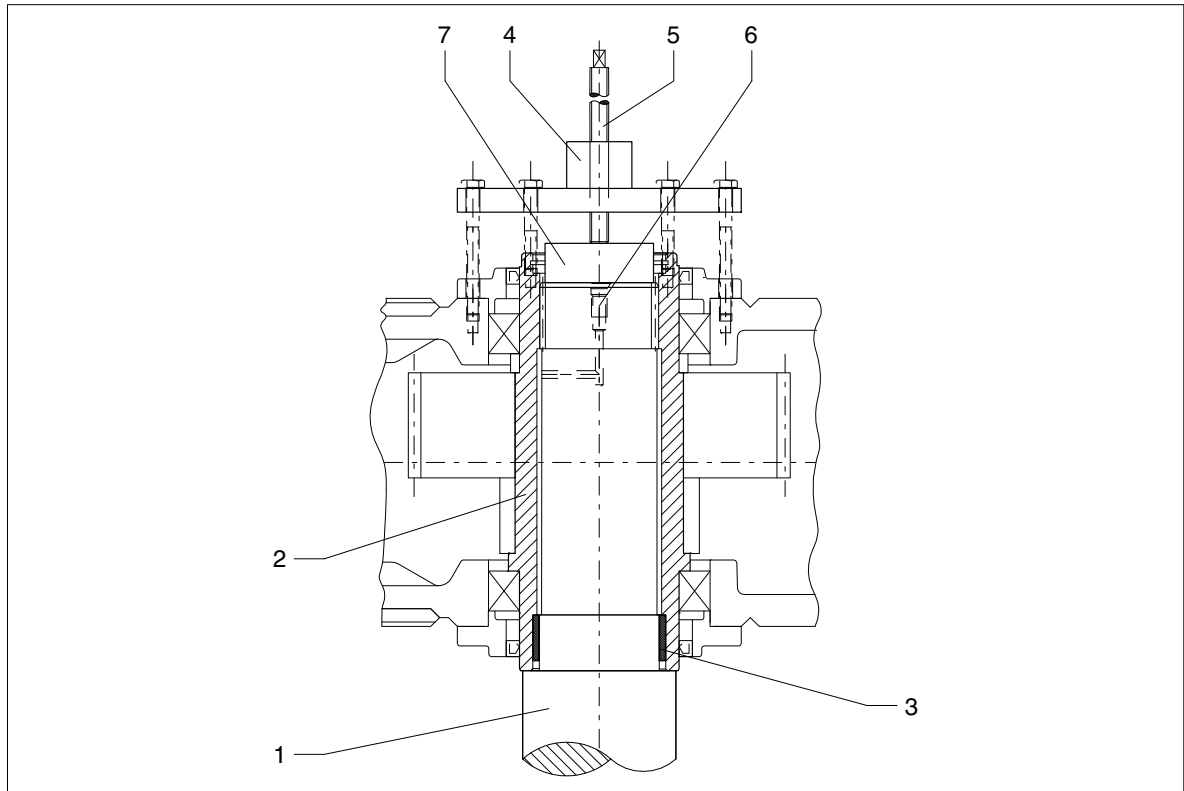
Hollow shaft with internal spline, demounting with hydraulic lifting unit
